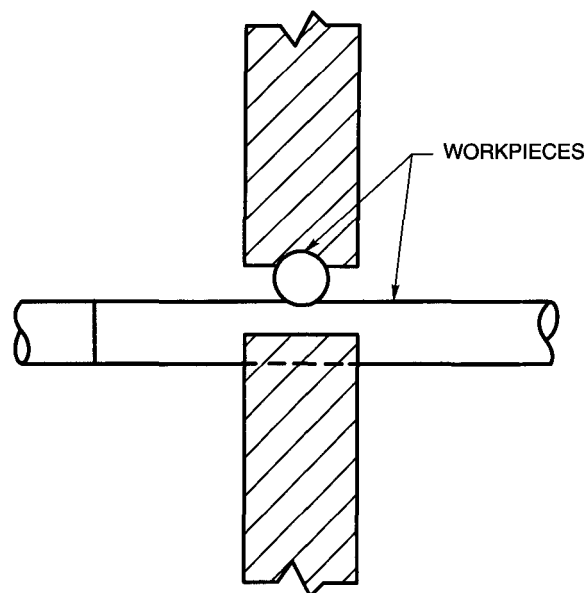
View of Mash Welding Electrodes Grooved to Hold the Workpieces
